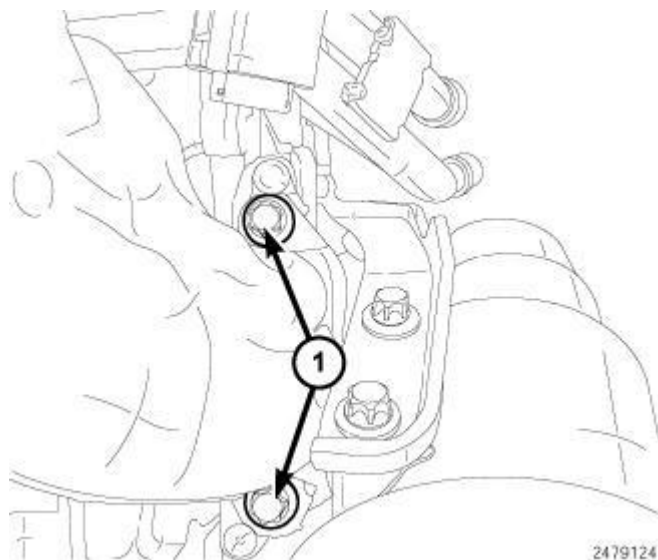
Knock Sensor Electrical Connector, Mixing Chamber & Bolts
